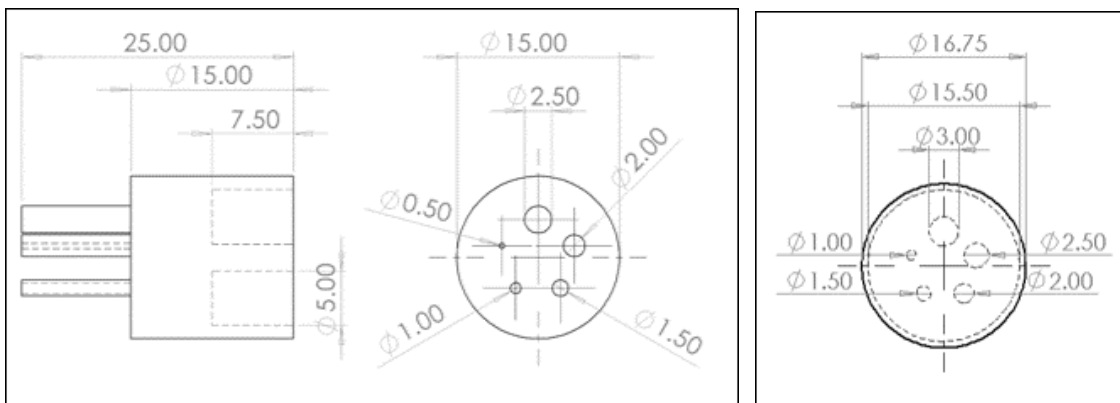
The IQ phantom CAD designs. Dimensions are in millimeters.
